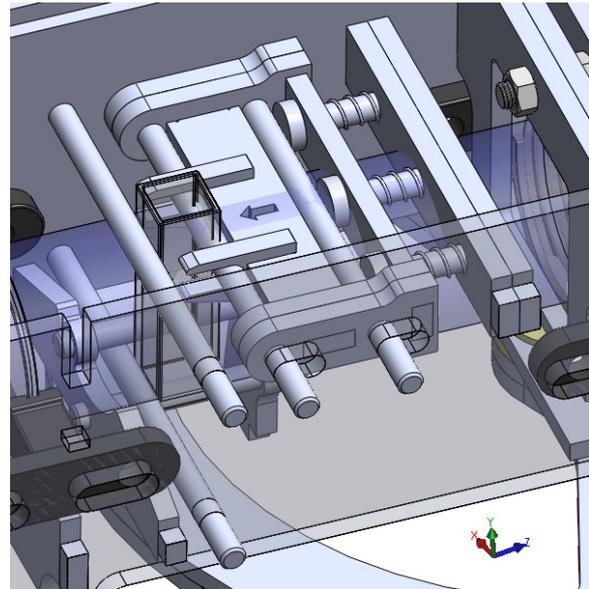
CAD model closeup of the AFLS sample holder with cuvette inserted.
